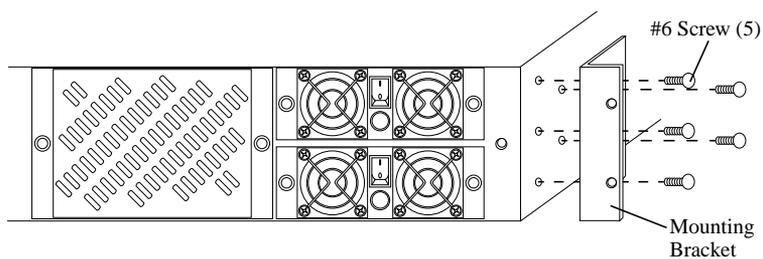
Attaching the Mounting Brackets to Front of the RM660
